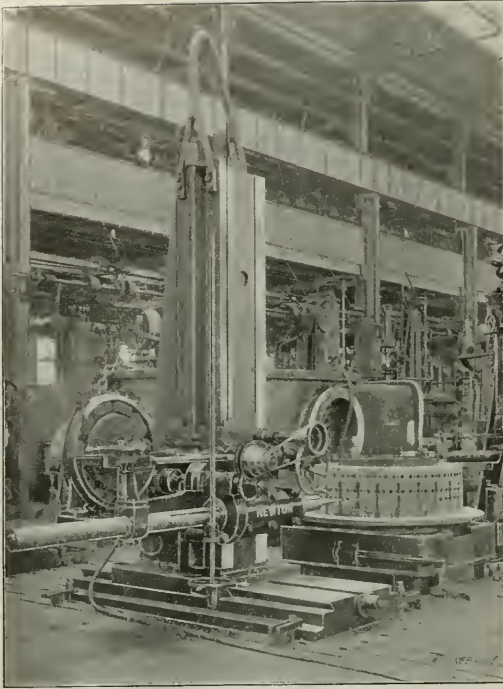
Portable Horizontal Drilling and Milling Machine, Used in Connection with Portable Indexing Device.
